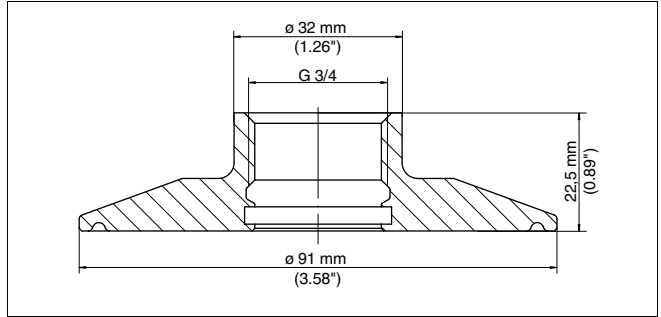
Dimensions adapter G $\frac{3}{4}$  A according to DIN 3852-X on Clamp 32" PN16 ( $\phi$  91 mm) DIN 32676, ISO 2852/316L
